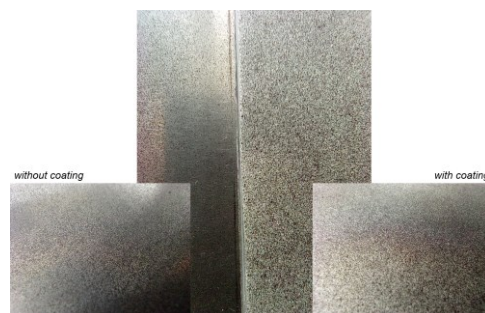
Pattern on the blanks' surfaces, prepared using sprayed black paint
